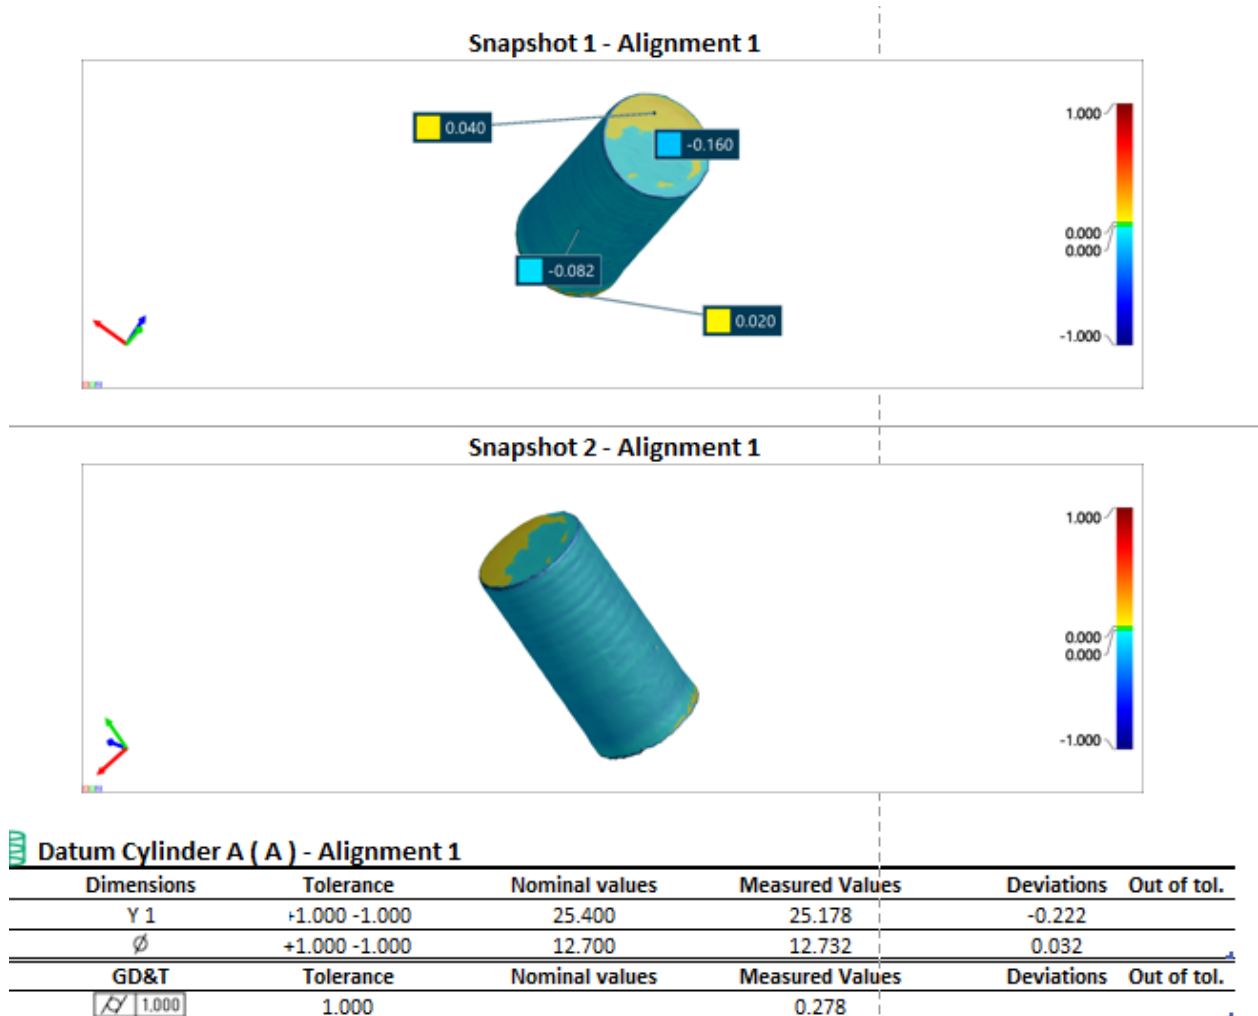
Finalized Inspection Report for One Cylinder
